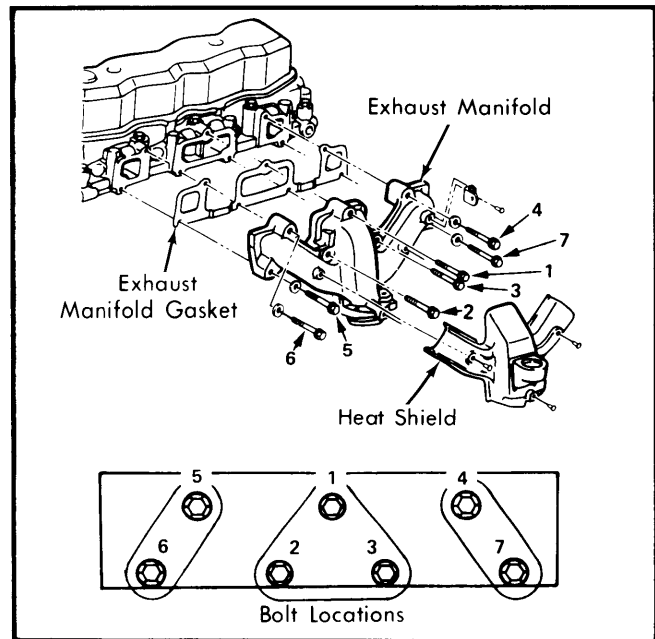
Exhaust Manifold Bolt Torque Sequence
